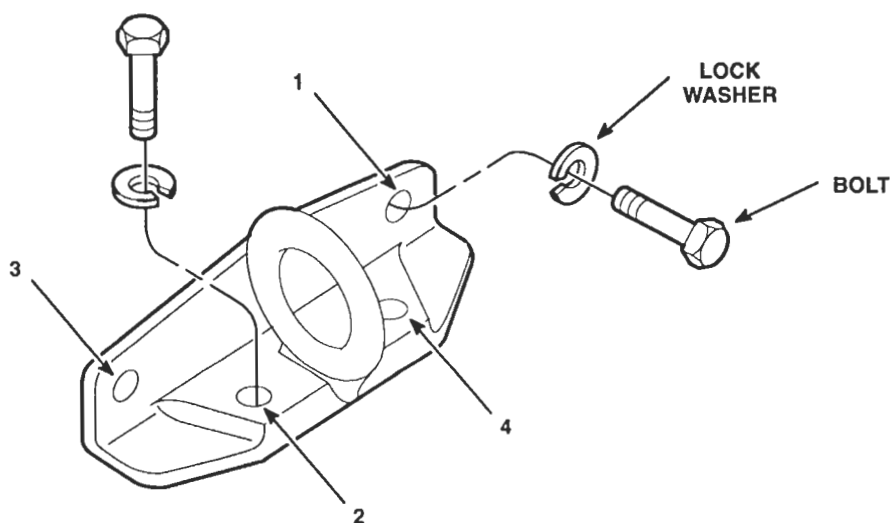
Engine Lifter Bracket and Bolt Tightening Sequence
